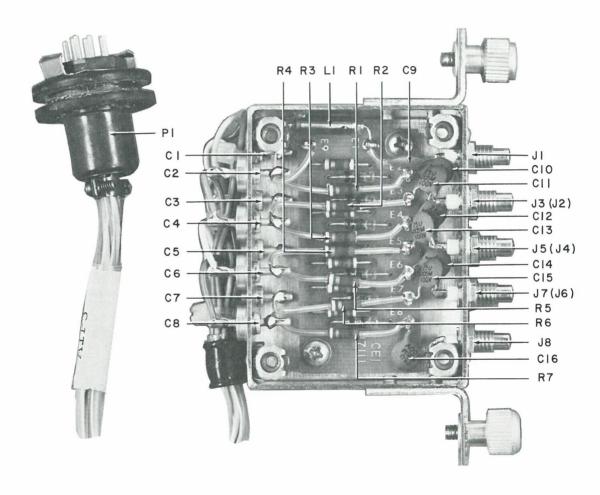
Type 791123 IF Switch Assembly, A3, Component Locations
